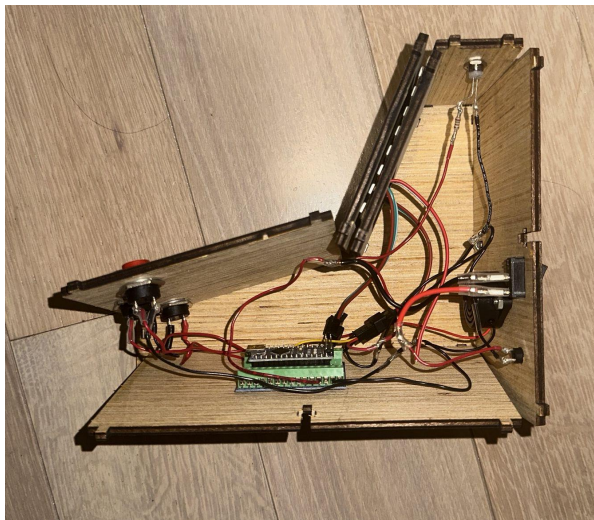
shows the inside isometric view of the assembled arcade case showing button terminations, rocker switch, and wiring harnesses. The enclosure integrates electrical safety with component fastening per industry guidelines [1], [2].
